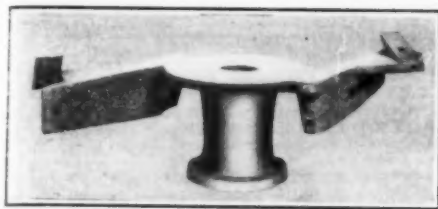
View of the Scraper Arm Casting of the Continuous Centrifugal Filter
